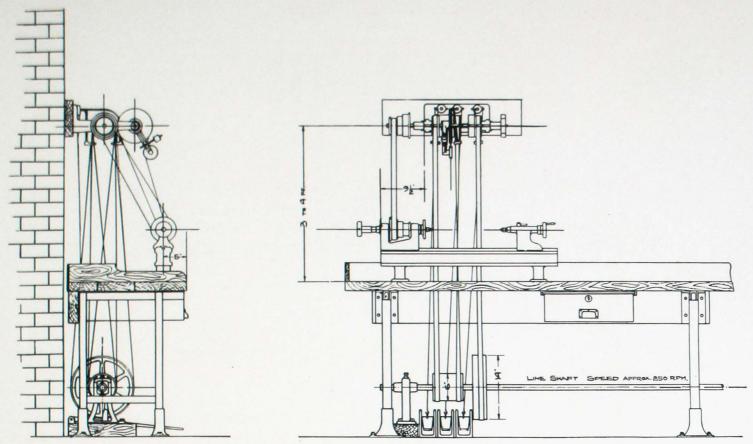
Lathe on Wall Bench, Countershaft on Wall, Drive from Lineshaft underneath Bench.
